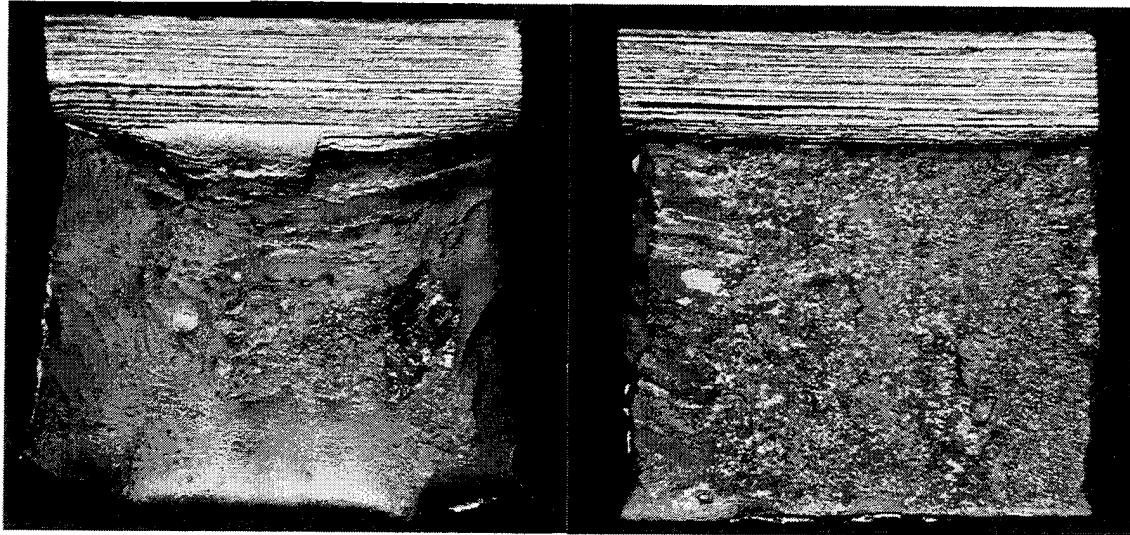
MV6 Ductile and Brittle Fracture Surfaces (6.4 x)
